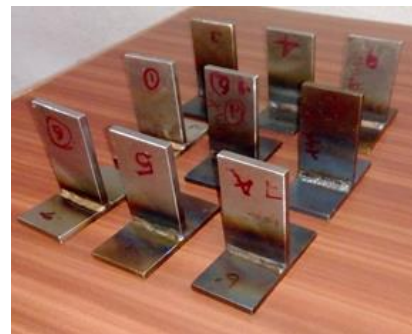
Nine types of welded T- joints by TIG welding process
